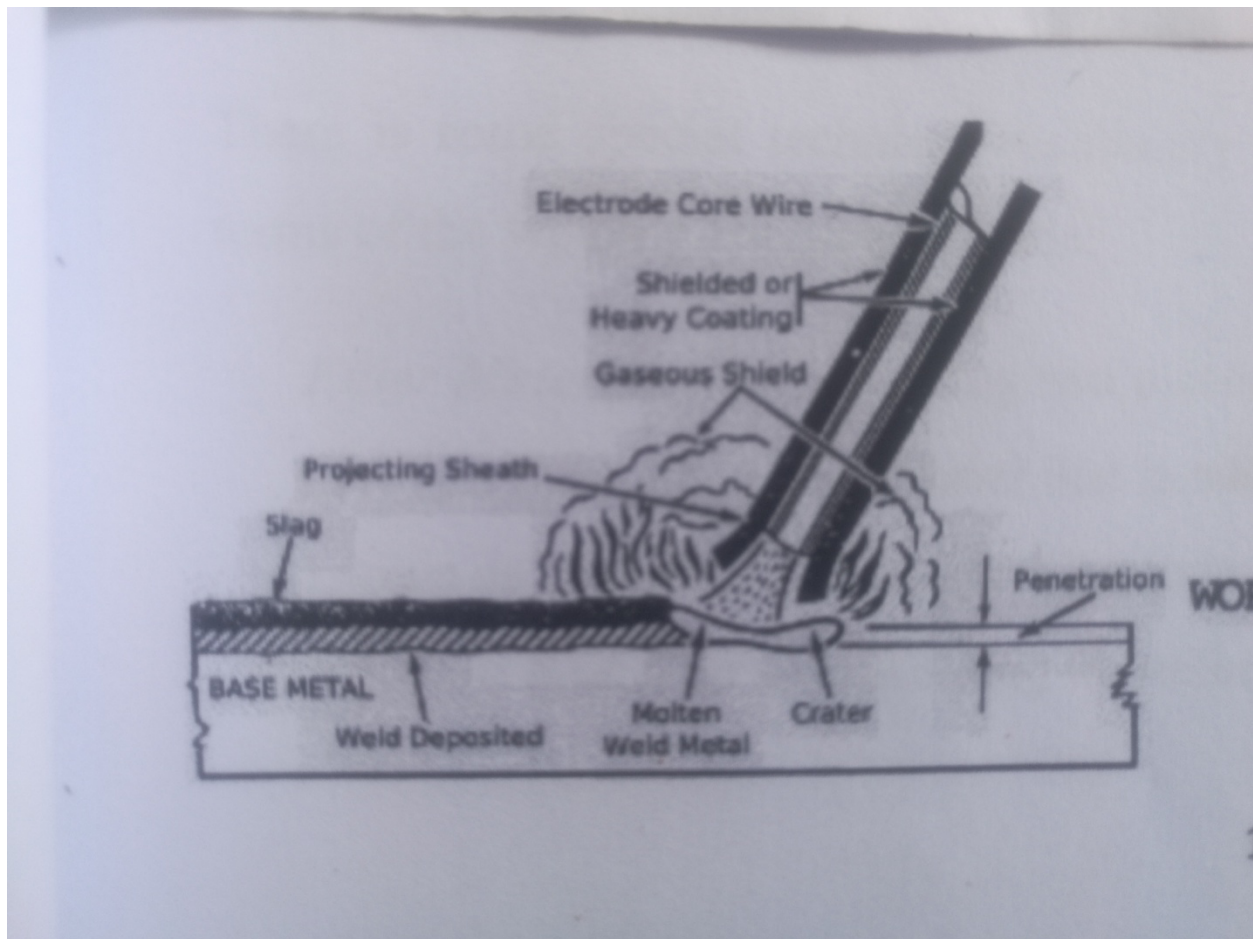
PRINCIPLE OF ARC WELDING
